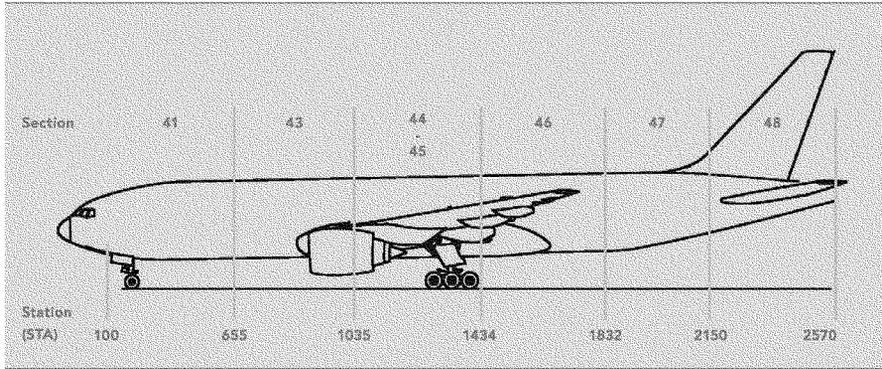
Schematic diagram of Boeing 777 Sections and Stations. (Source: Dutch Safety Board)
